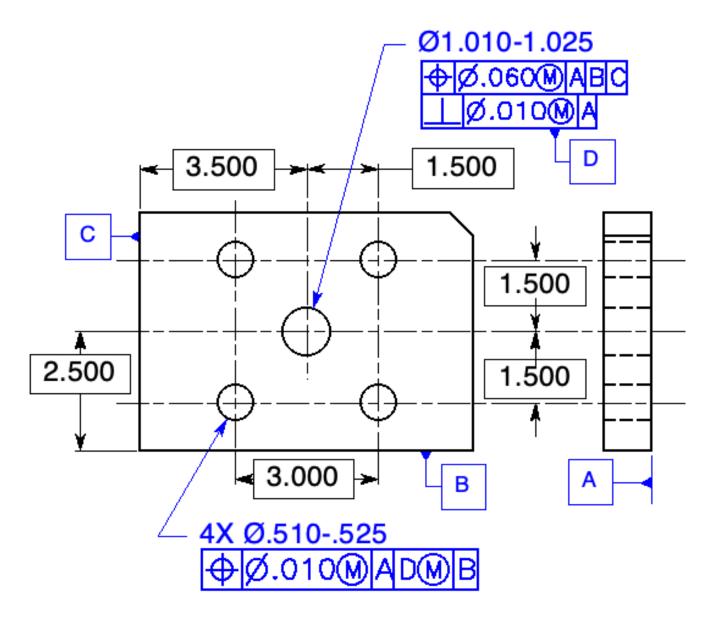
Design a gage to inspect for shift tolerance: Probs. 7 and 8.
